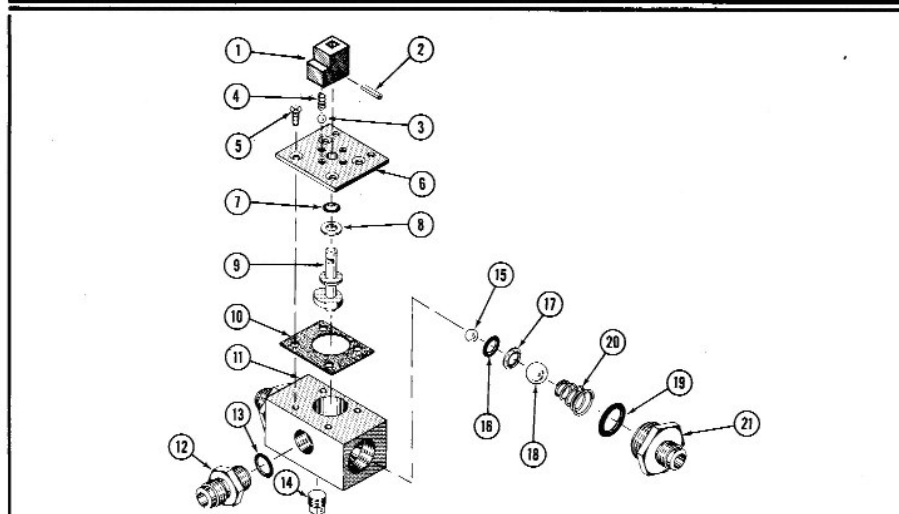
FUEL SELECTOR VALVE ASSEMBLY
